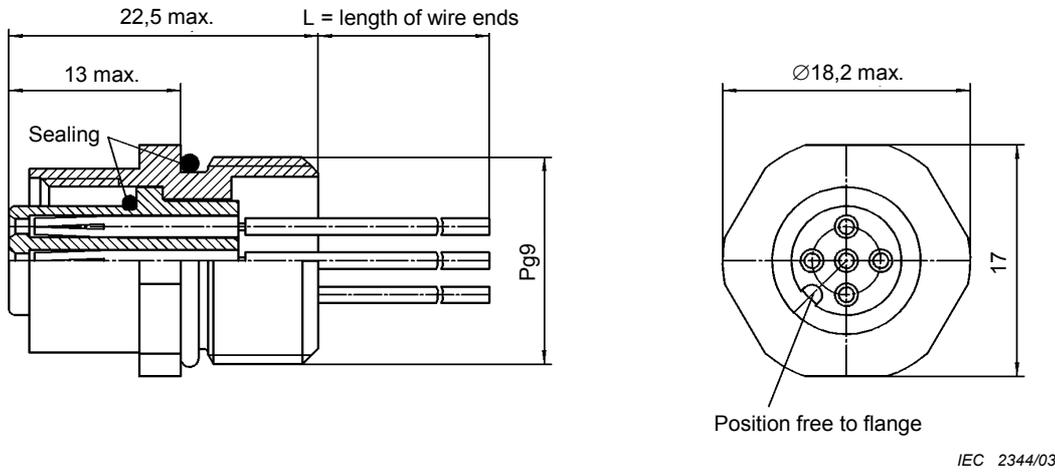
Fixed connector, with wire ends, single hole mounting Pg9, female contacts
